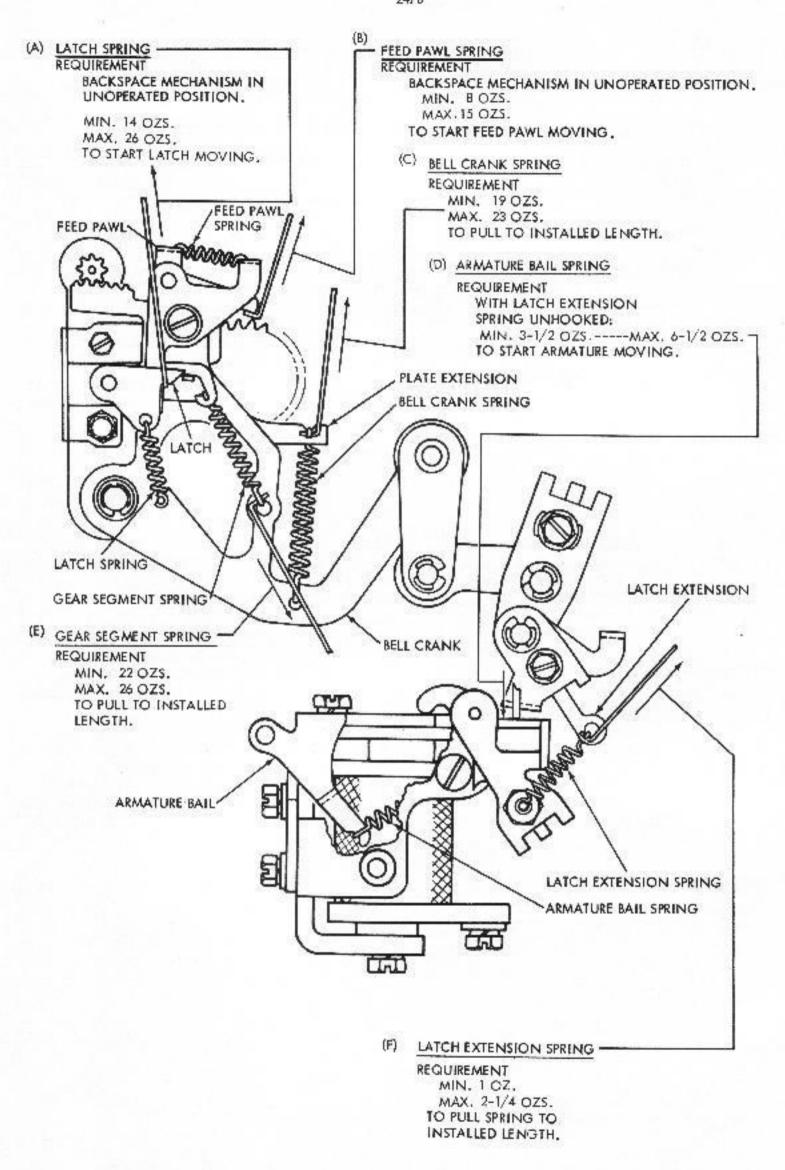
MANUAL AND POWER DRIVE BACKSPACE MECHANISM FOR CHADLESS TAPE
